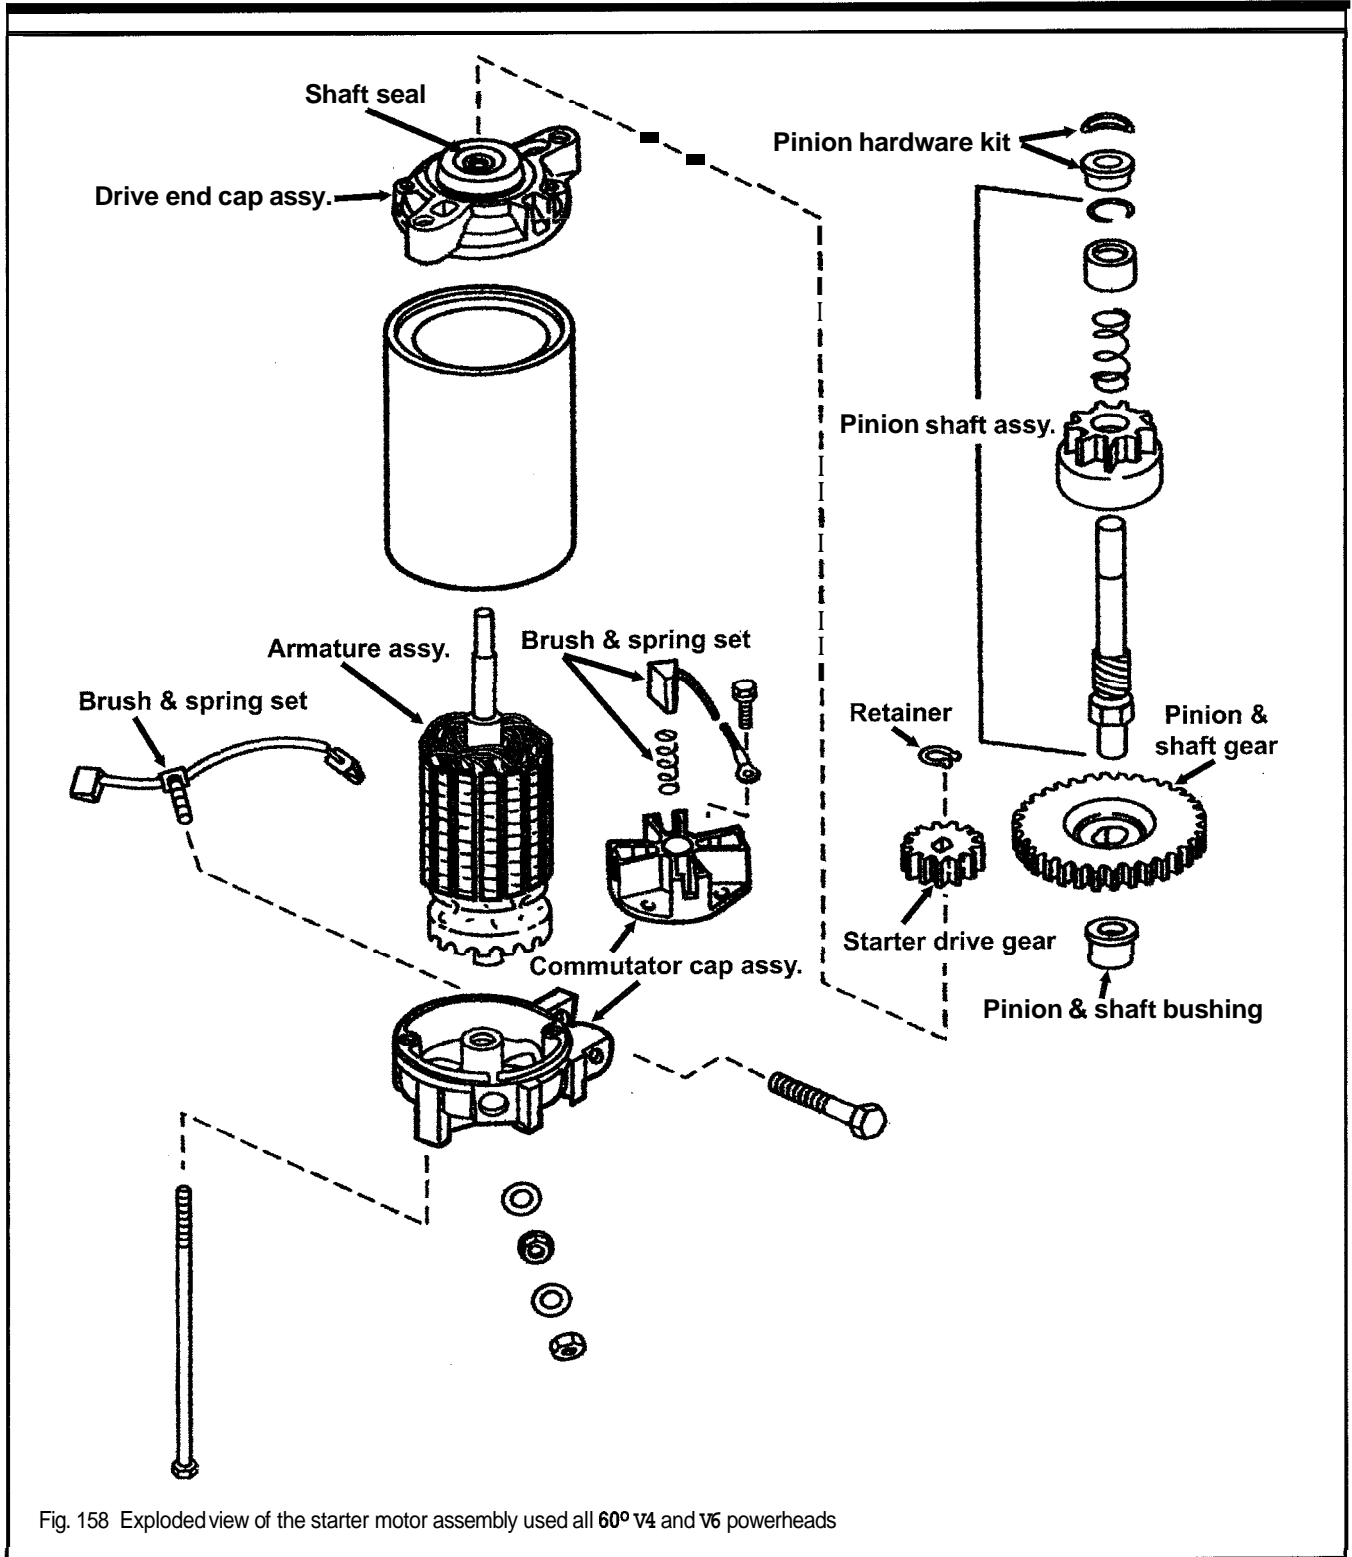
Exploded view of the starter motor assembly used all 60° V4 and V6 powerheads
